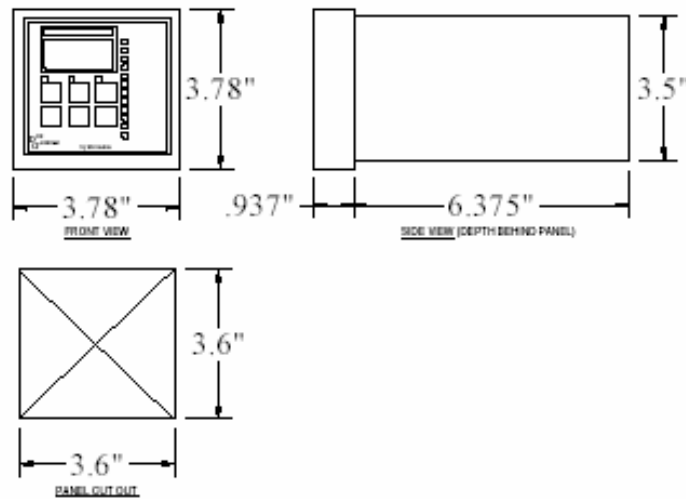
A Physical Dimensions for the Digi-Gage 2300 (similar to 2400 and 2600)
